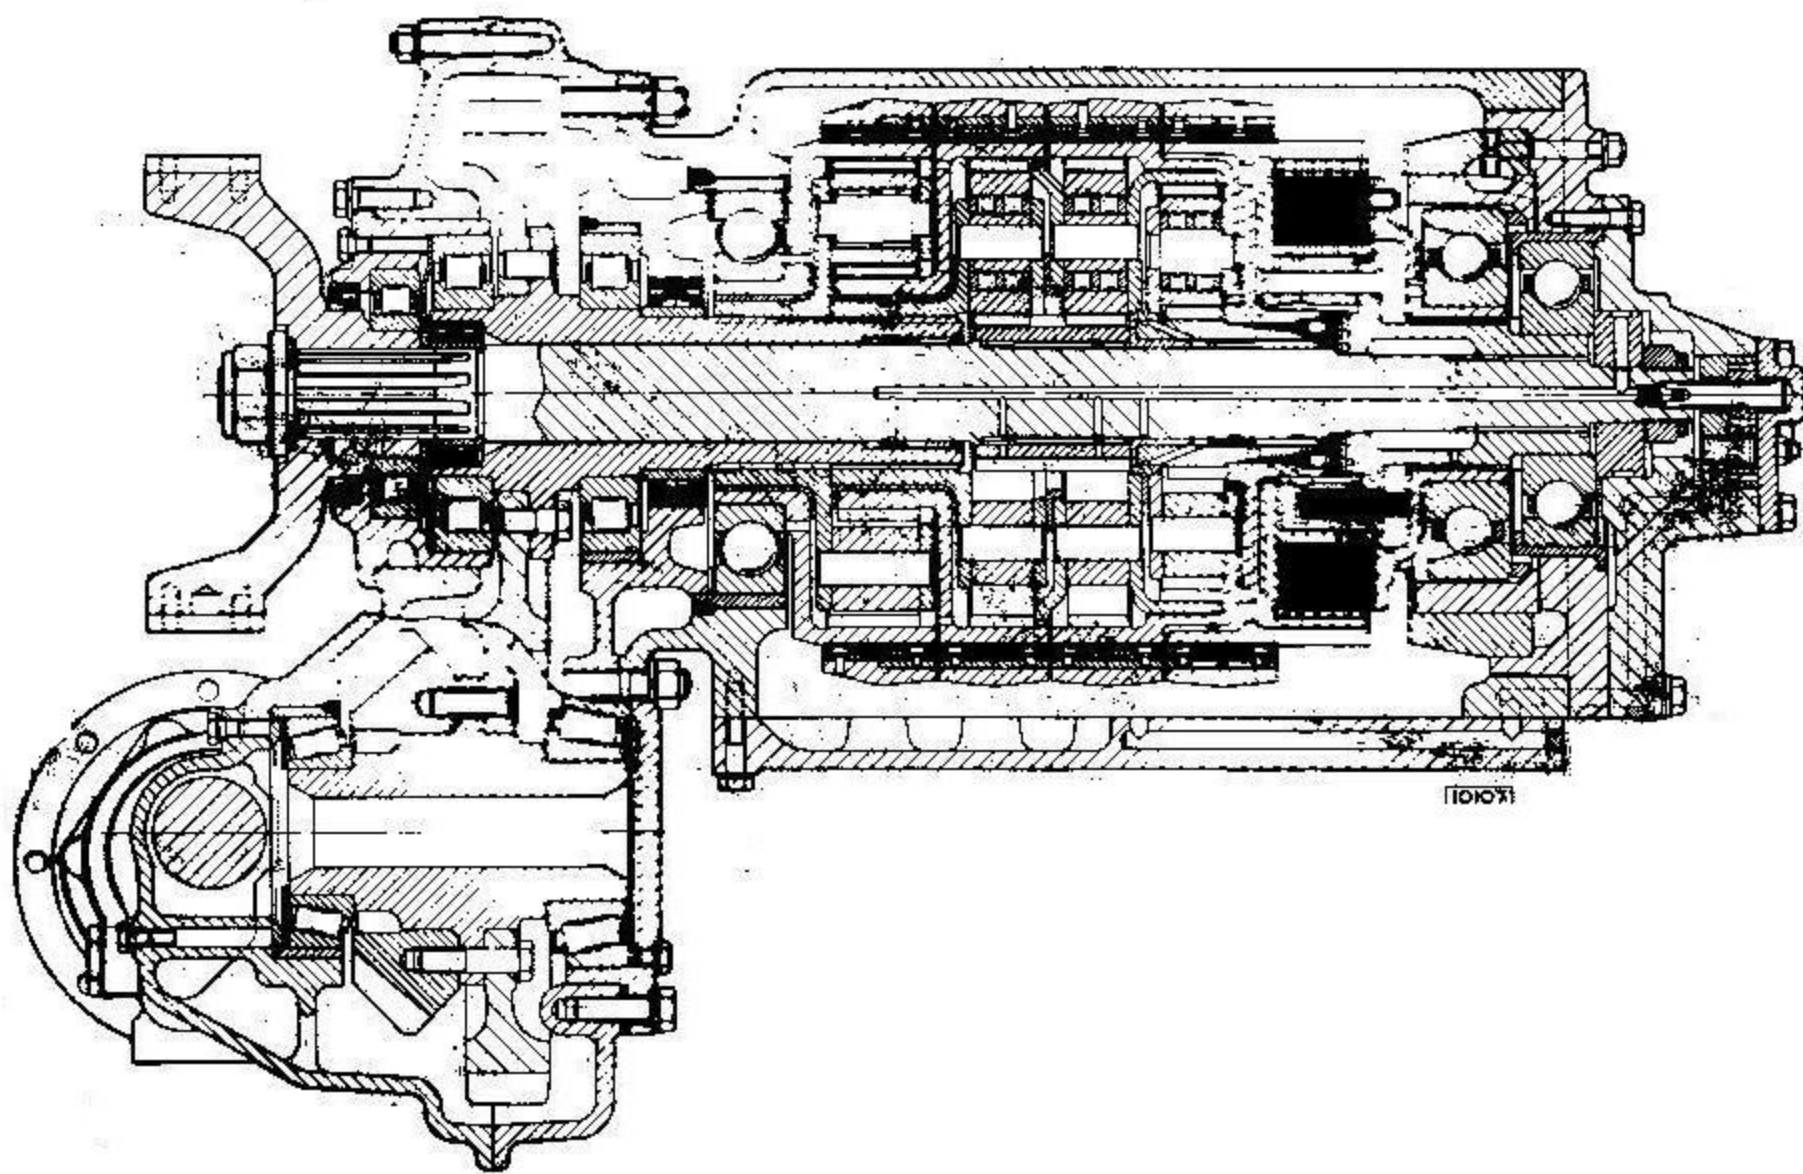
Sectioned view of the "Daimatic" gearbox and transfer box
